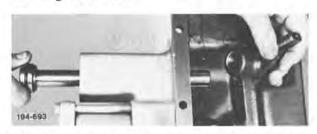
Installing Shift Rail and Shifter 20. Install reverse shift cover o-ring and reverse shift cover. See Figure 5-422.
